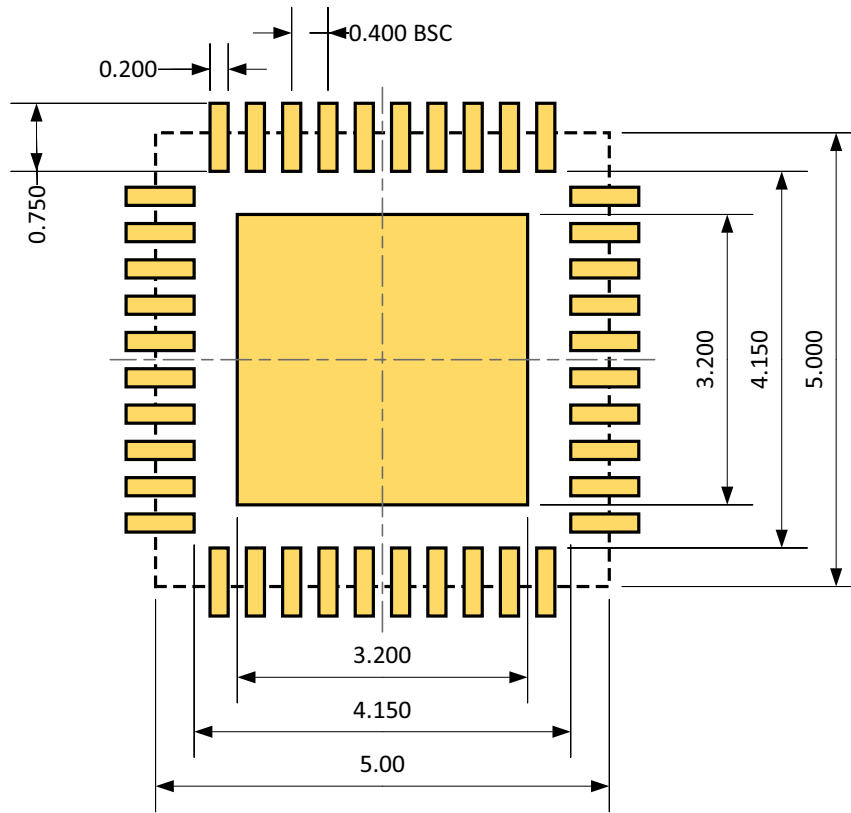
Recommended Board Layout for QFN40 package (All Dimensions in mm)
